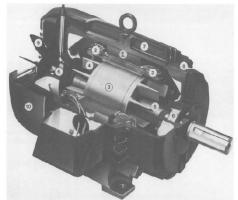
Cross-sectional view of Electric Energy Efficient Motor : 1-Stator laminated steel; 2-stator windings; 3-rotor; 4-rotor fan blades; 5-shaft; 6-bearings; 7-frame; 8-brackets; 9- external fan; 10-fan cover. (Source: Reliance Electric Company.)
